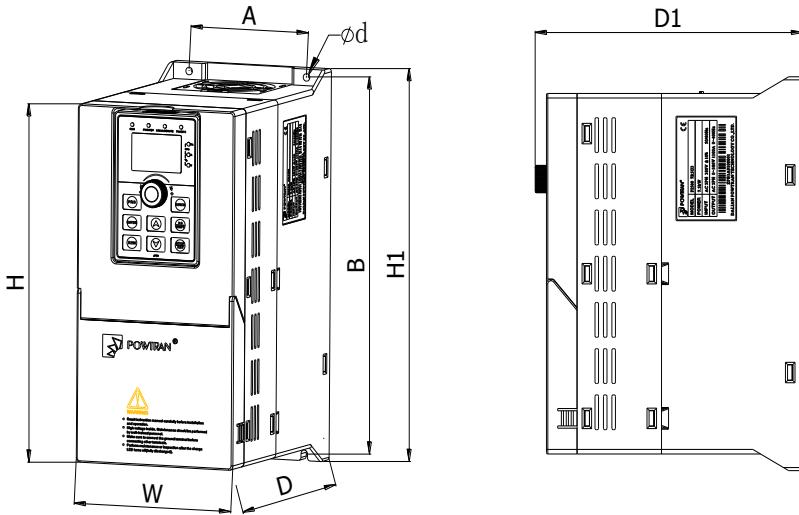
1. 30kW G3 above product outside drawing, installation dimension
